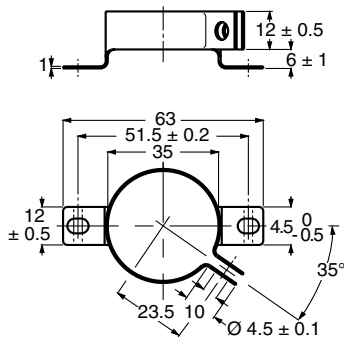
Dimensional outline of clamp for case $\varnothing D = 35 \text{ mm}$
